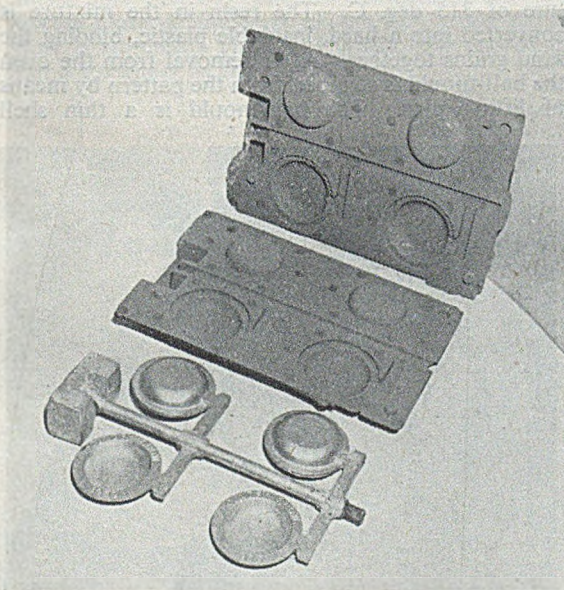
Two Half-moulds and a Spray of Castings Produced by the Process.
